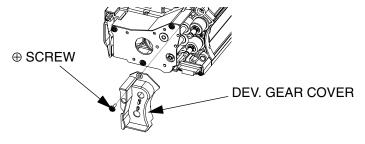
Removal of the Idler Gear (Z21) Assembly
